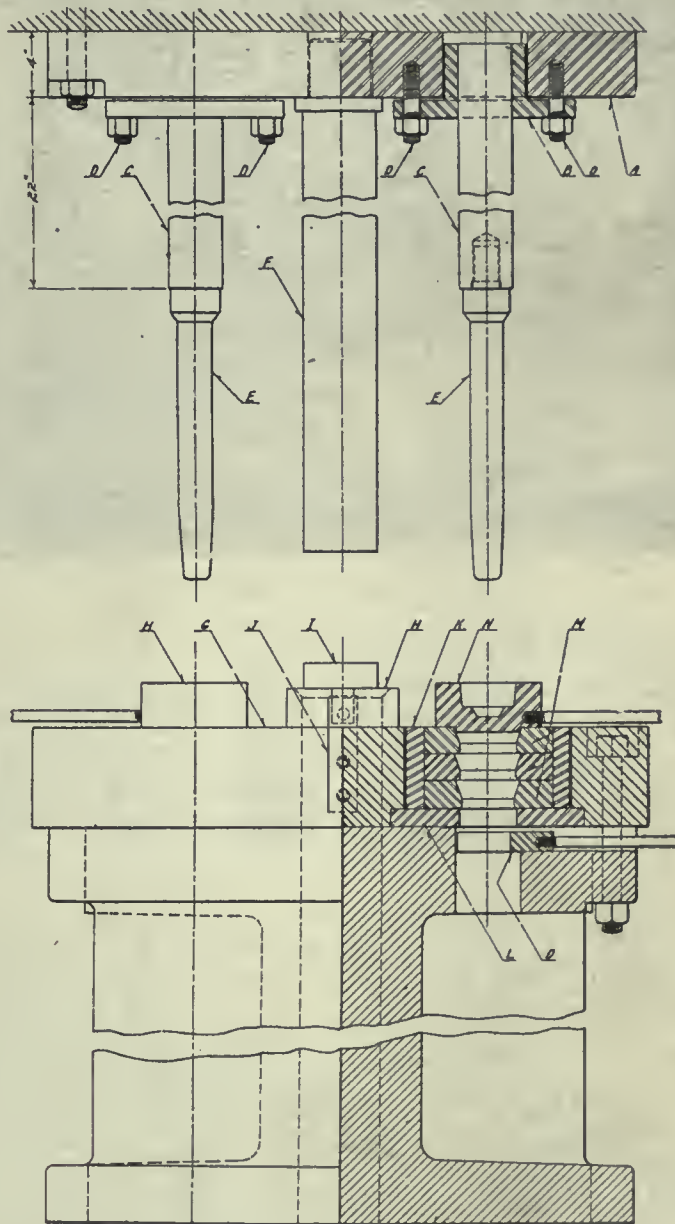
ASSEMBLY OF TOOLING FOR DRAWING OPERATION.
